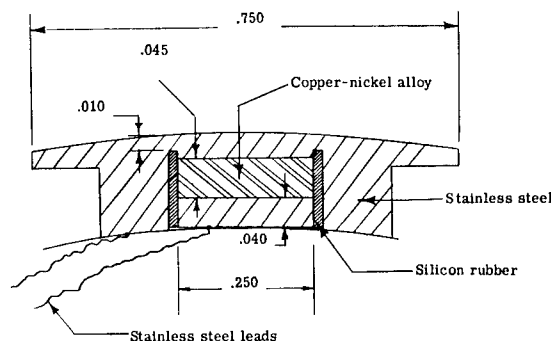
Cross-section details of a differential thermocouple heat-flux gauge used in the Langley 20-in. Mach 6 wind tunnel.
